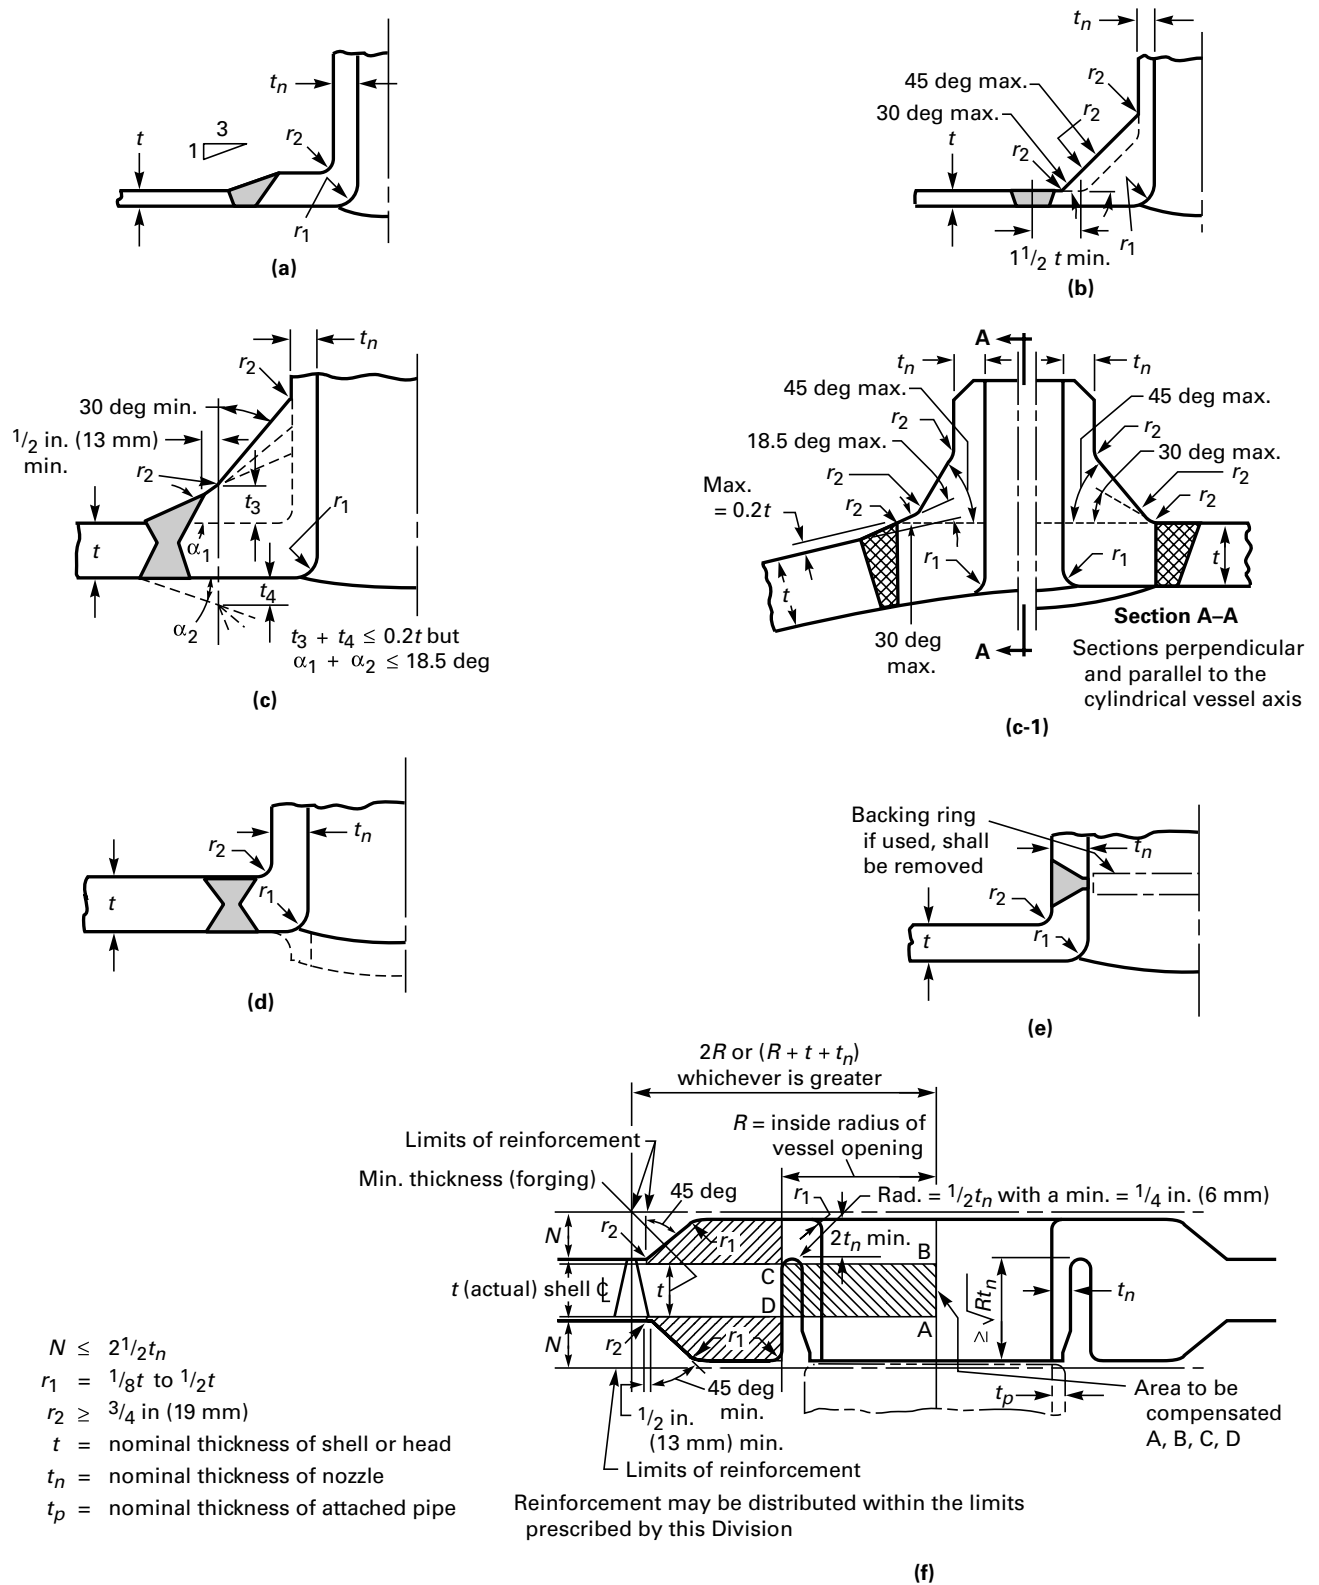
ACCEPTABLE WELDED NOZZLE ATTACHMENT READILY RADIOGRAPHED TO CODE STANDARDS
